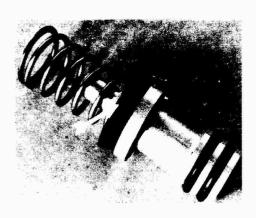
Arrow Shows Groove in Brake Master-Cylinder Valve on M151A1C after 5090 Test Miles.
